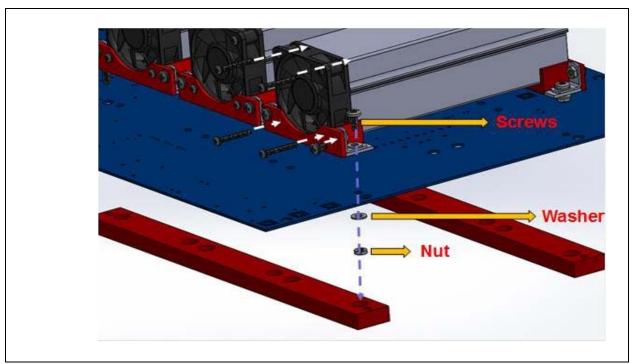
Heat Sink to PCB Assembly Diagram.
